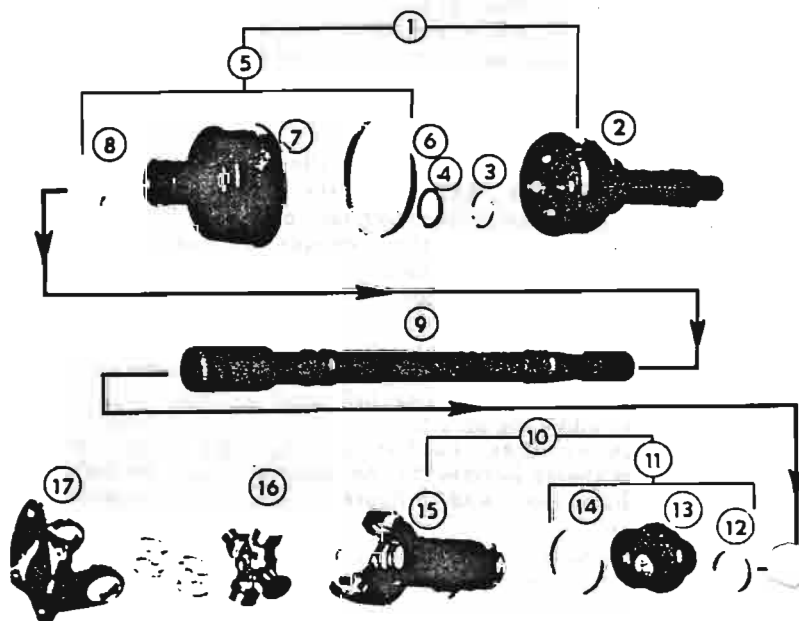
Typical drive shaft assemblies as used on B.L.M.C. front wheel drive cars.
